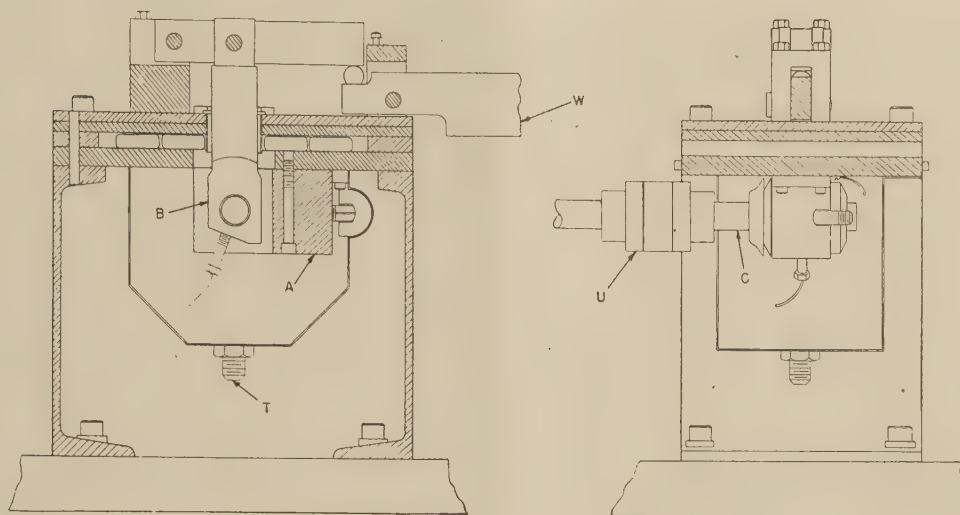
ASSEMBLY DRAWING OF BEARING MACHINE
